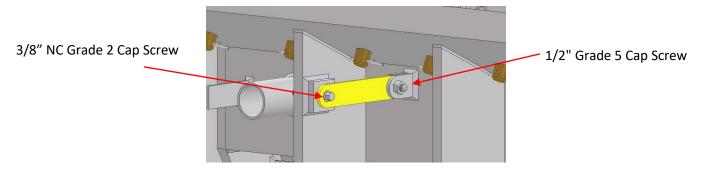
Fasteners in Screen Trip Latch Locking Bar
